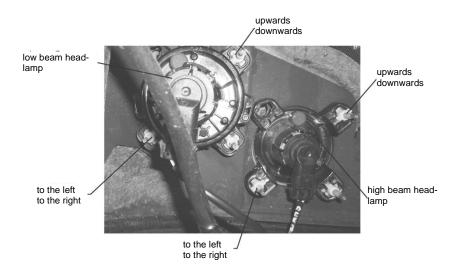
Layout of adjustment screws on left headlights (view from inside the hood).
